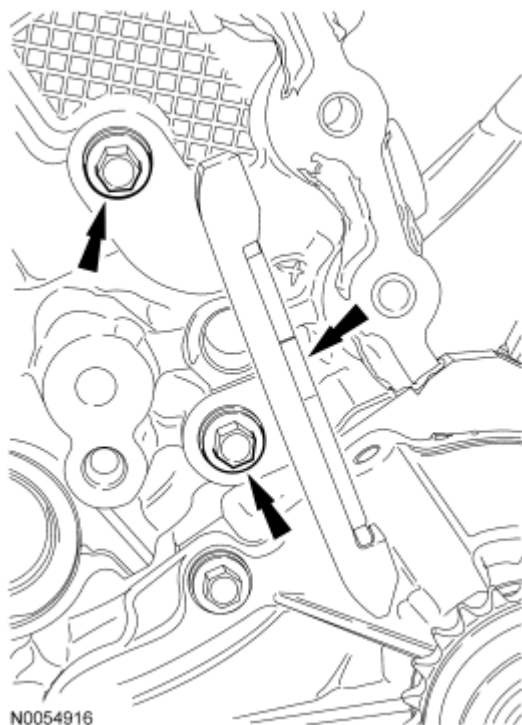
Locating RH Primary Timing Chain Guide Lower Bolt
